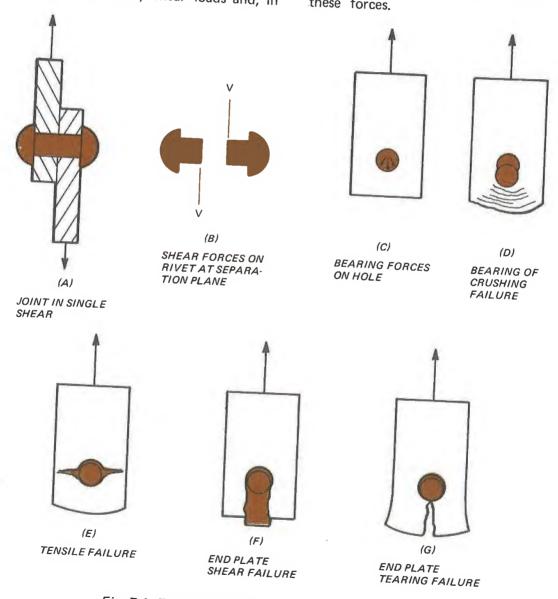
Forces and Failure Modes of a Riveted Joint
